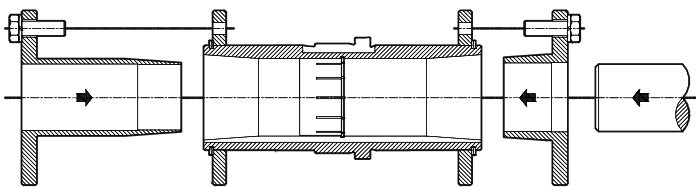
Short Shaft Bushing and Output Hub Assembly
